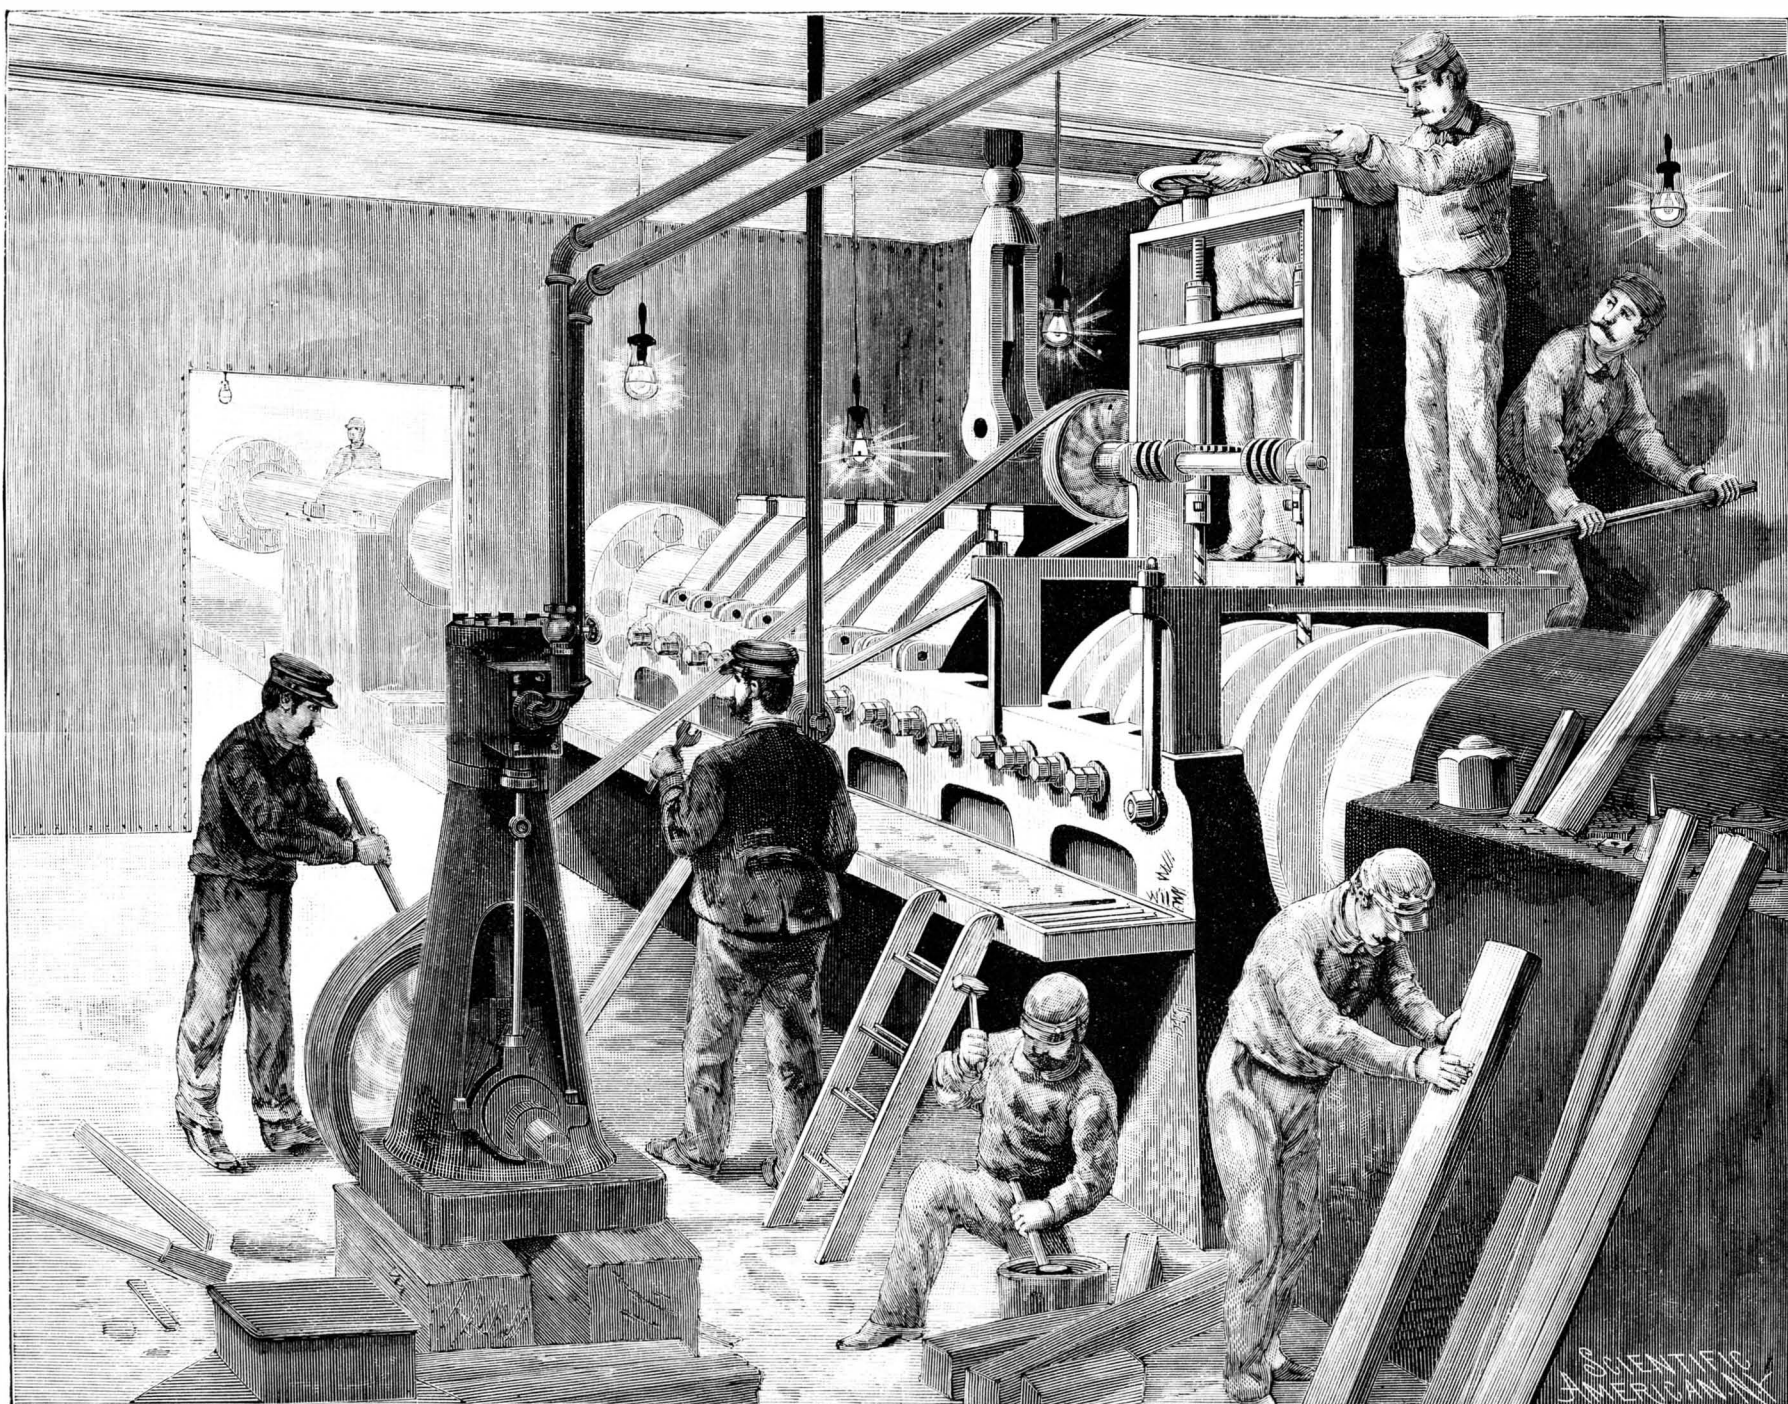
THE CUNARD STEAMER UMBRIA—THE SPECIAL DUPLEX DRILLS FOR CUTTING OUT THE BROKEN SECTION OF THE MAIN SHAFT.—[See page 56.]
